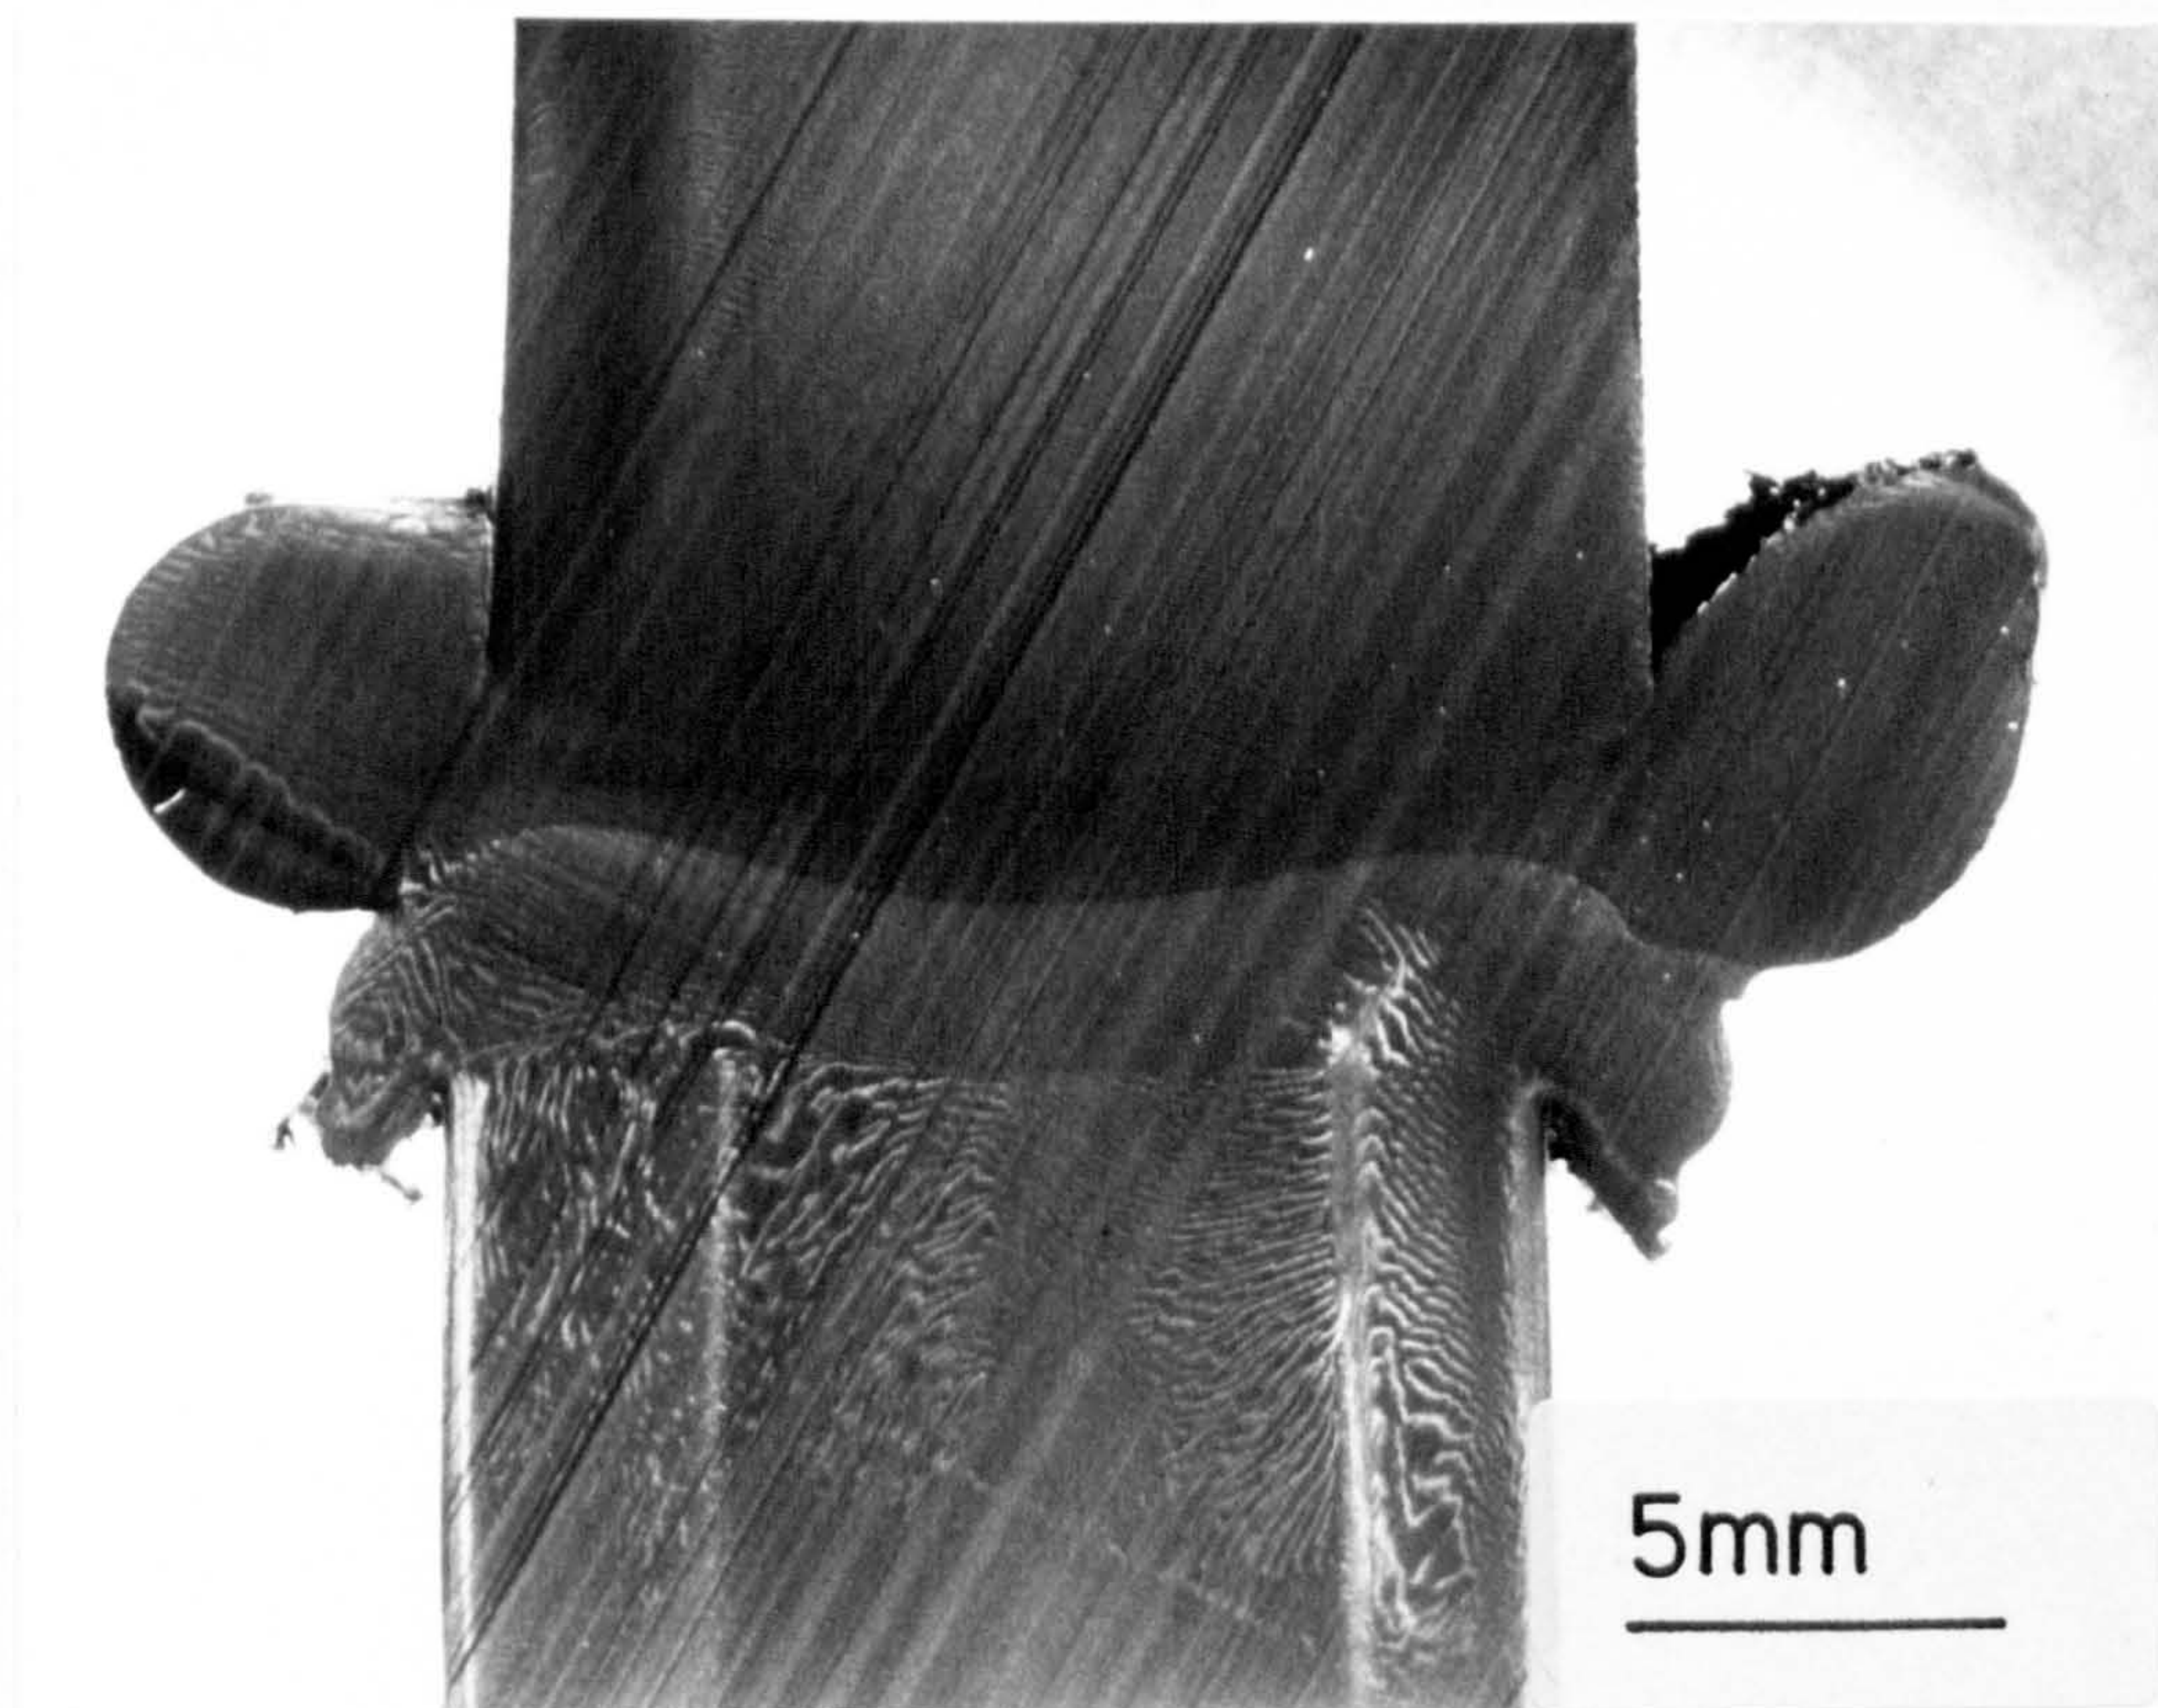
Surface of an HDPE butt-weld produced by removing a thick section of nearly $40\ \mu\text{m}$.
